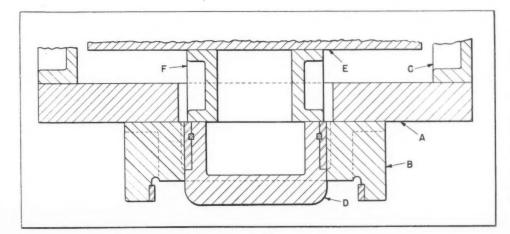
Special Equipment is Required to Adapt a Double - action Drawing Die to a Toggle Press. This Includes Such Parts as a Blank-holder Plate A, which Holds the Upper Binder Ring B, and a Punch Adapter F which Reduces the Size and Weight of the Punch and Provides for Interchangeability of Dies on Different Presses
